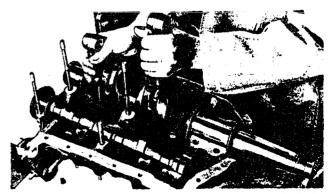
Installing and Removing Crankshaft and Connecting Rods.
